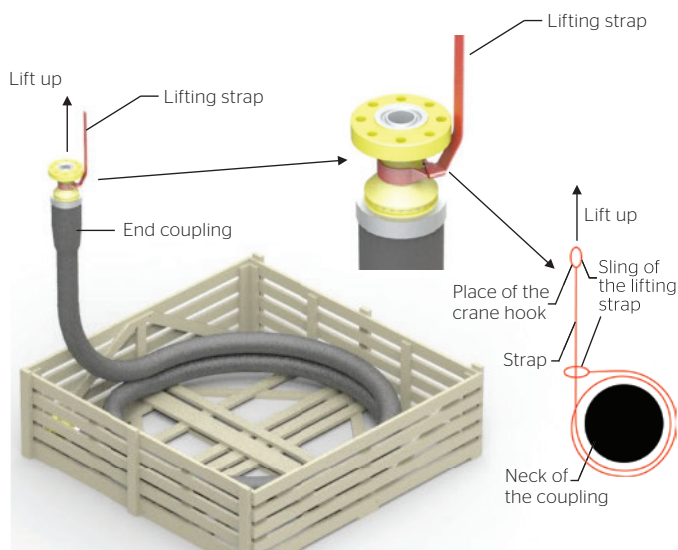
Unpacking by using sling on the neck of the flexible line assembly
